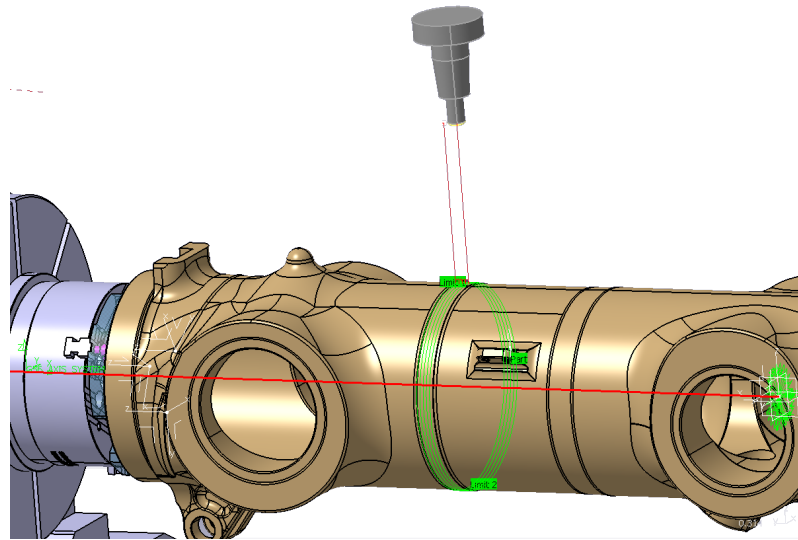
CAD model showing the industrial steady band machining tool path.
